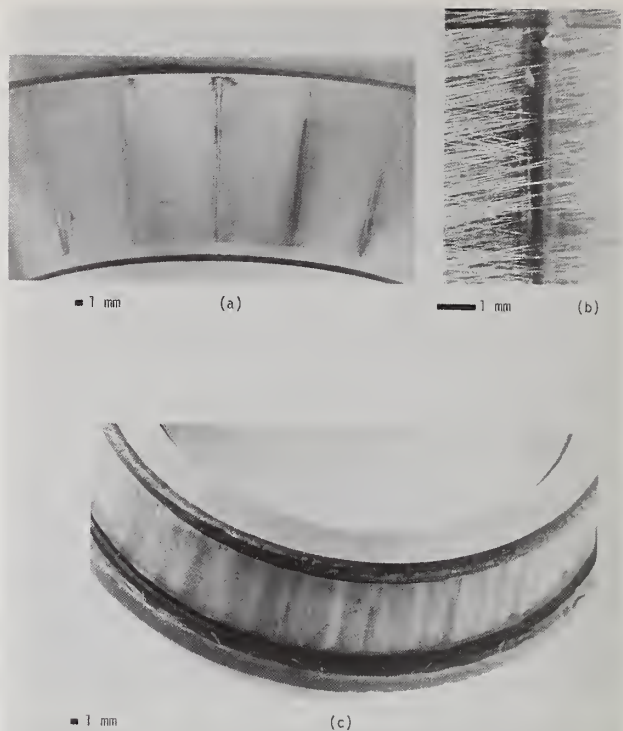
Fretting damage on a cup in (a) and (b) and severe fretting and corrosion on a cone in (c). In (c) the fretting damage is evident on the L. E. rib as well as the raceway.
